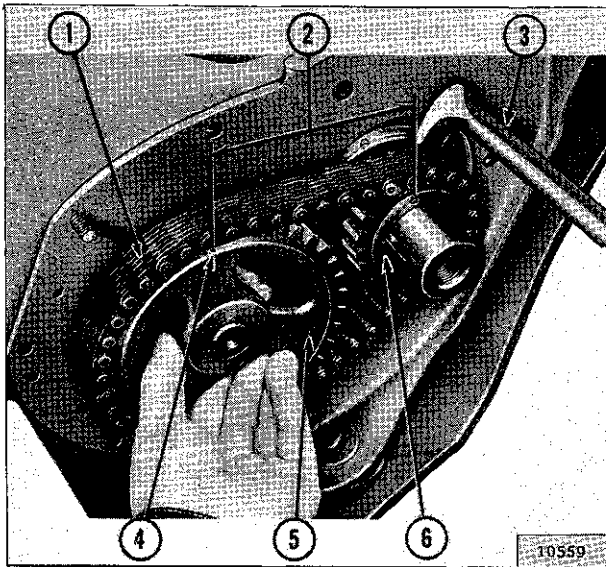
REMOVING TIMING CHAIN AND GEARS
